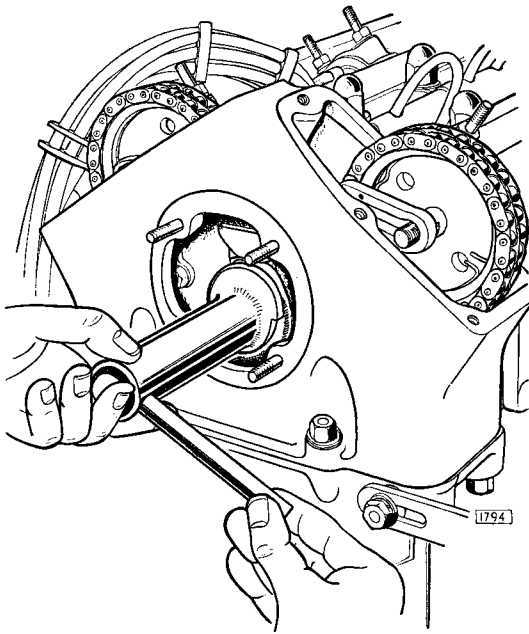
Adjusting the top timing chain (Churchill Tool Number J.2)
